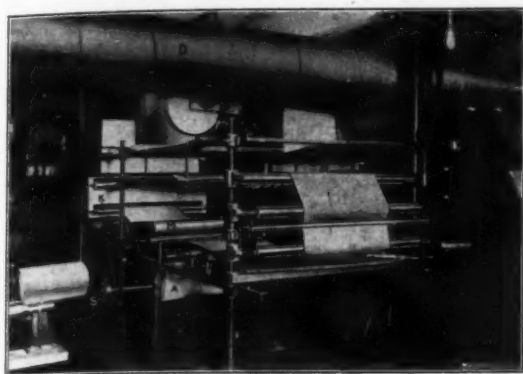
Front View of Coating Machine and Dryer for Blue Print Paper.
